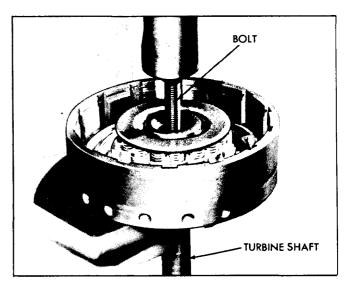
E-116 Pressing Turbine Shaft From Clutch Housing
